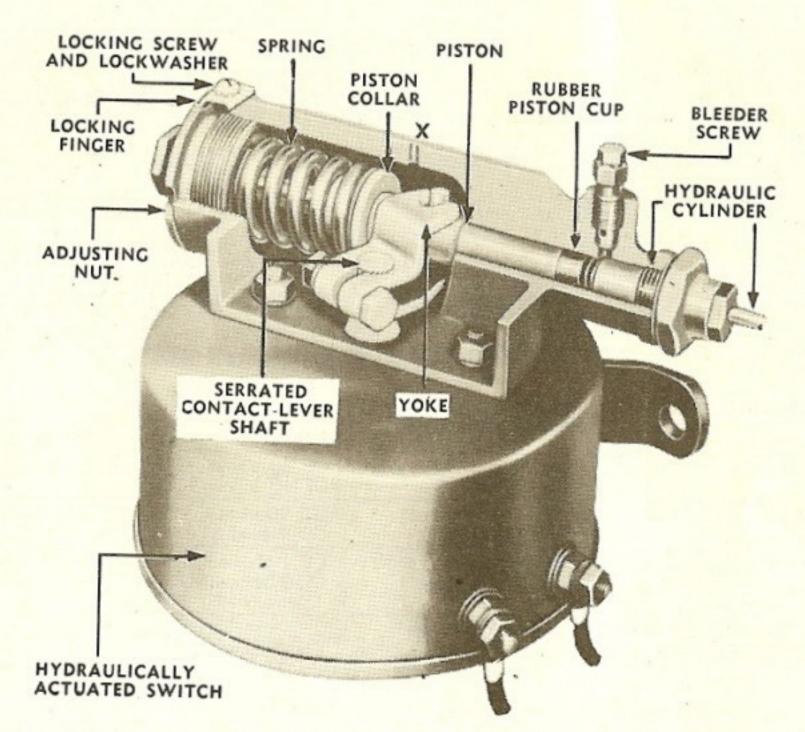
This view of the switch is cut-away so's you can see how it operates. Screw-hole "X" is for the screw that fastens the cover (Fig. 1).
